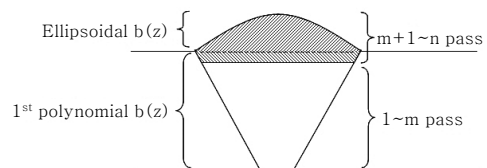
A concept drawing of butt-welded section for dividing integration intervals
